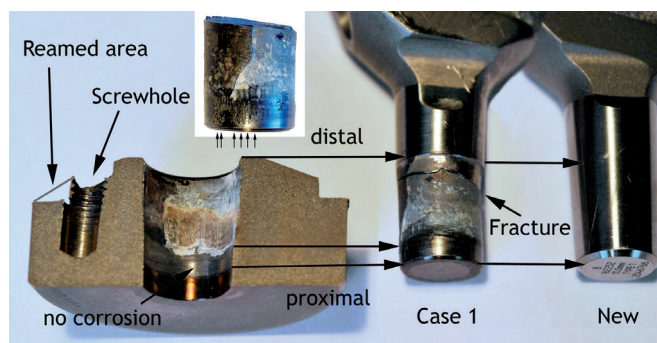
The cut ball head insert and stem taper (with broken-off piece placed in original position) together with a new stem taper. The screw hole was drilled into the ball head insert for removal (which was unsuccessful); reaming of the slope of the insert allowed holding on to the insert and successful removal. The distal edge of the ball head insert is imprinted circumferentially onto the stem taper (arrow). The proximal edge of the contact between male and female taper and also the edge of the corroded area are marked on the taper insert together with the corresponding position on the stem taper. The insert shows the scratches in the non-corroded area originating from entrapped bone pieces (small arrows) in the broken-off stem taper piece.
